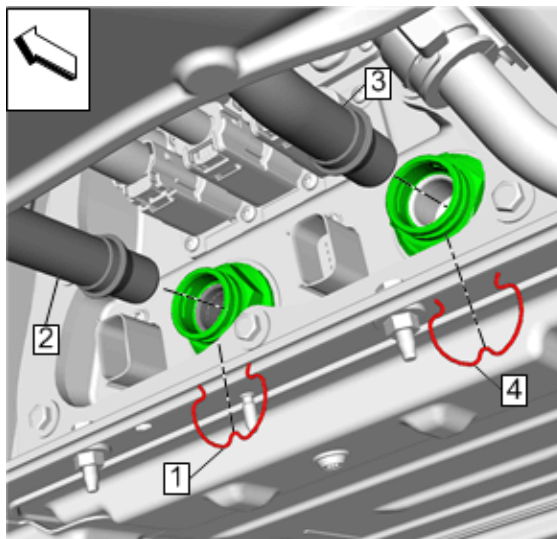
Drive Motor Battery Coolant Cooler Inlet Hose, Outlet Hose And Retainers
